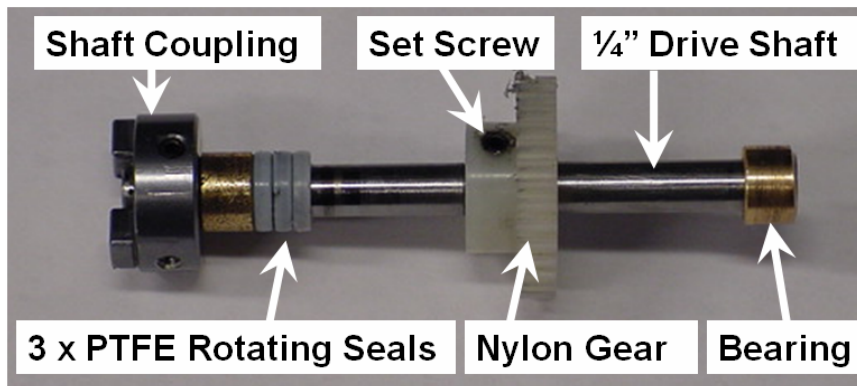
Crank shaft with flexible coupling, bearings, rotating seals, and gear.
